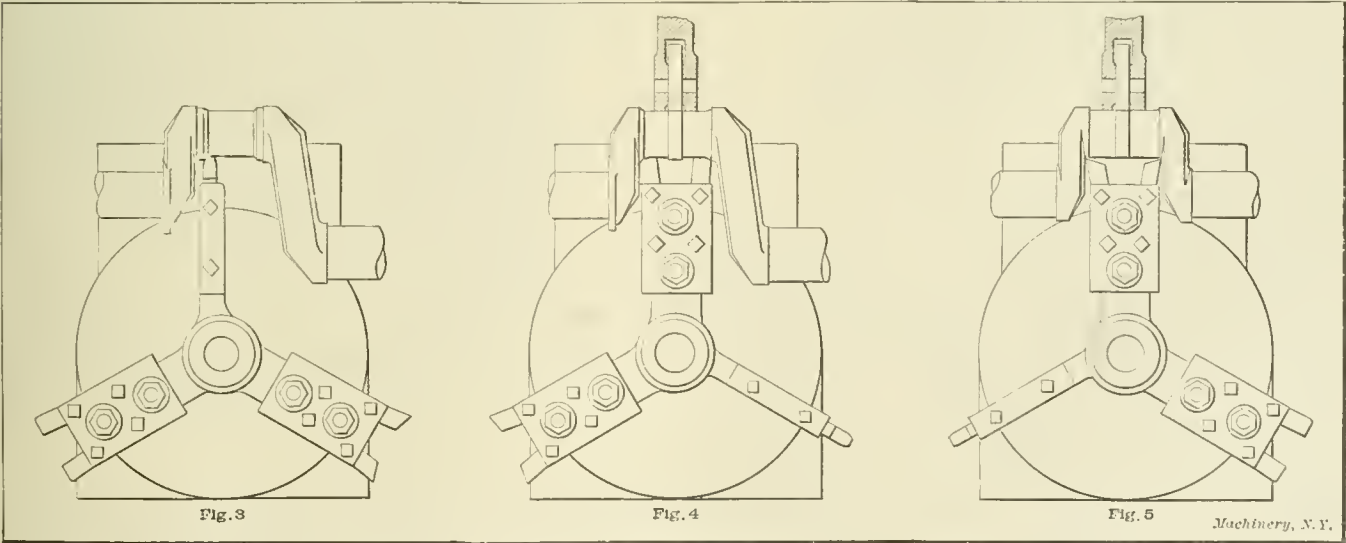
, 4 and 5. Plan Views showing Arrangement of Tools in Turret Tool-block of Crankshaft Lathe, and Successive Steps in finishing Pin
